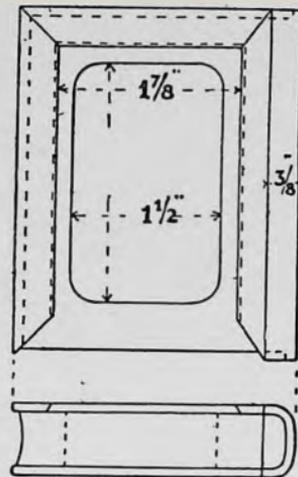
View of Book with Panel drawn out. Fig. 2: Plan and End View of Book with Panel removed.
